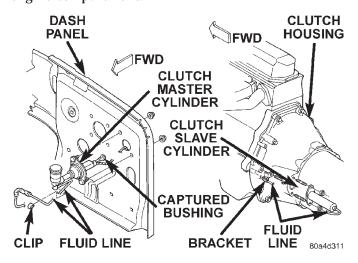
Slave Cylinder and Left Hand Drive Clutch Master Cylinder
